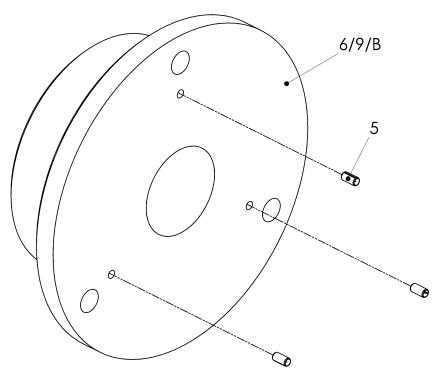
Preparing the hub/adapter/customer part (6/9/B) for mounting (design -1000...3000)
